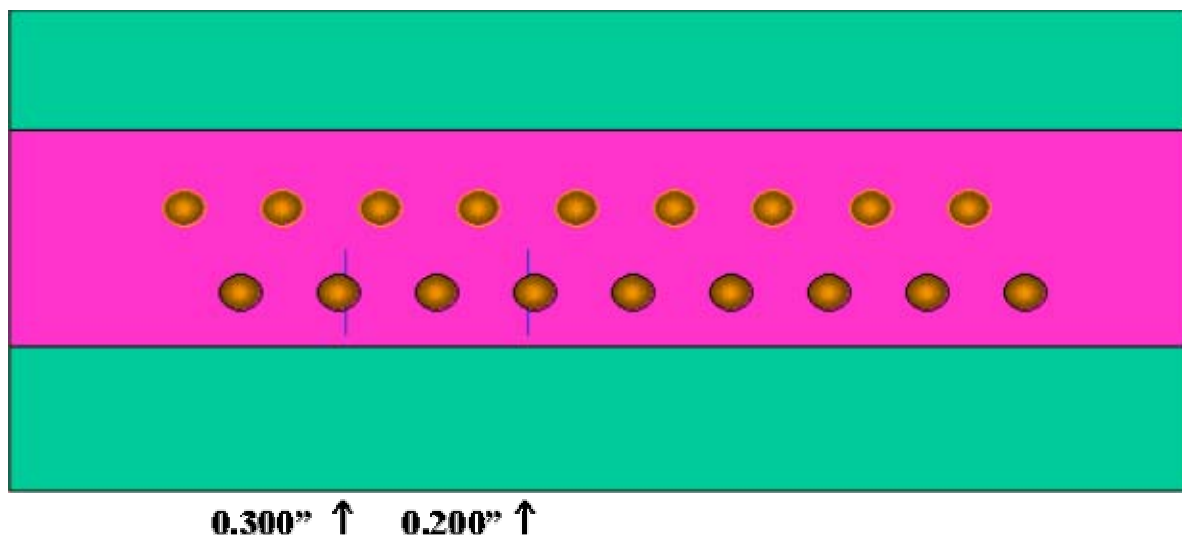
Sample used for initial performance demonstration of 64-element array: (Note: The wider upper layer has fastener holes with countersinks. The narrower lower layer has holes without countersinks. The four lines represent through cracks in the lower layer. The cracks on the second hole from the left are 0.300" each, and those on the fourth hole from the left are 0.200" each.)
